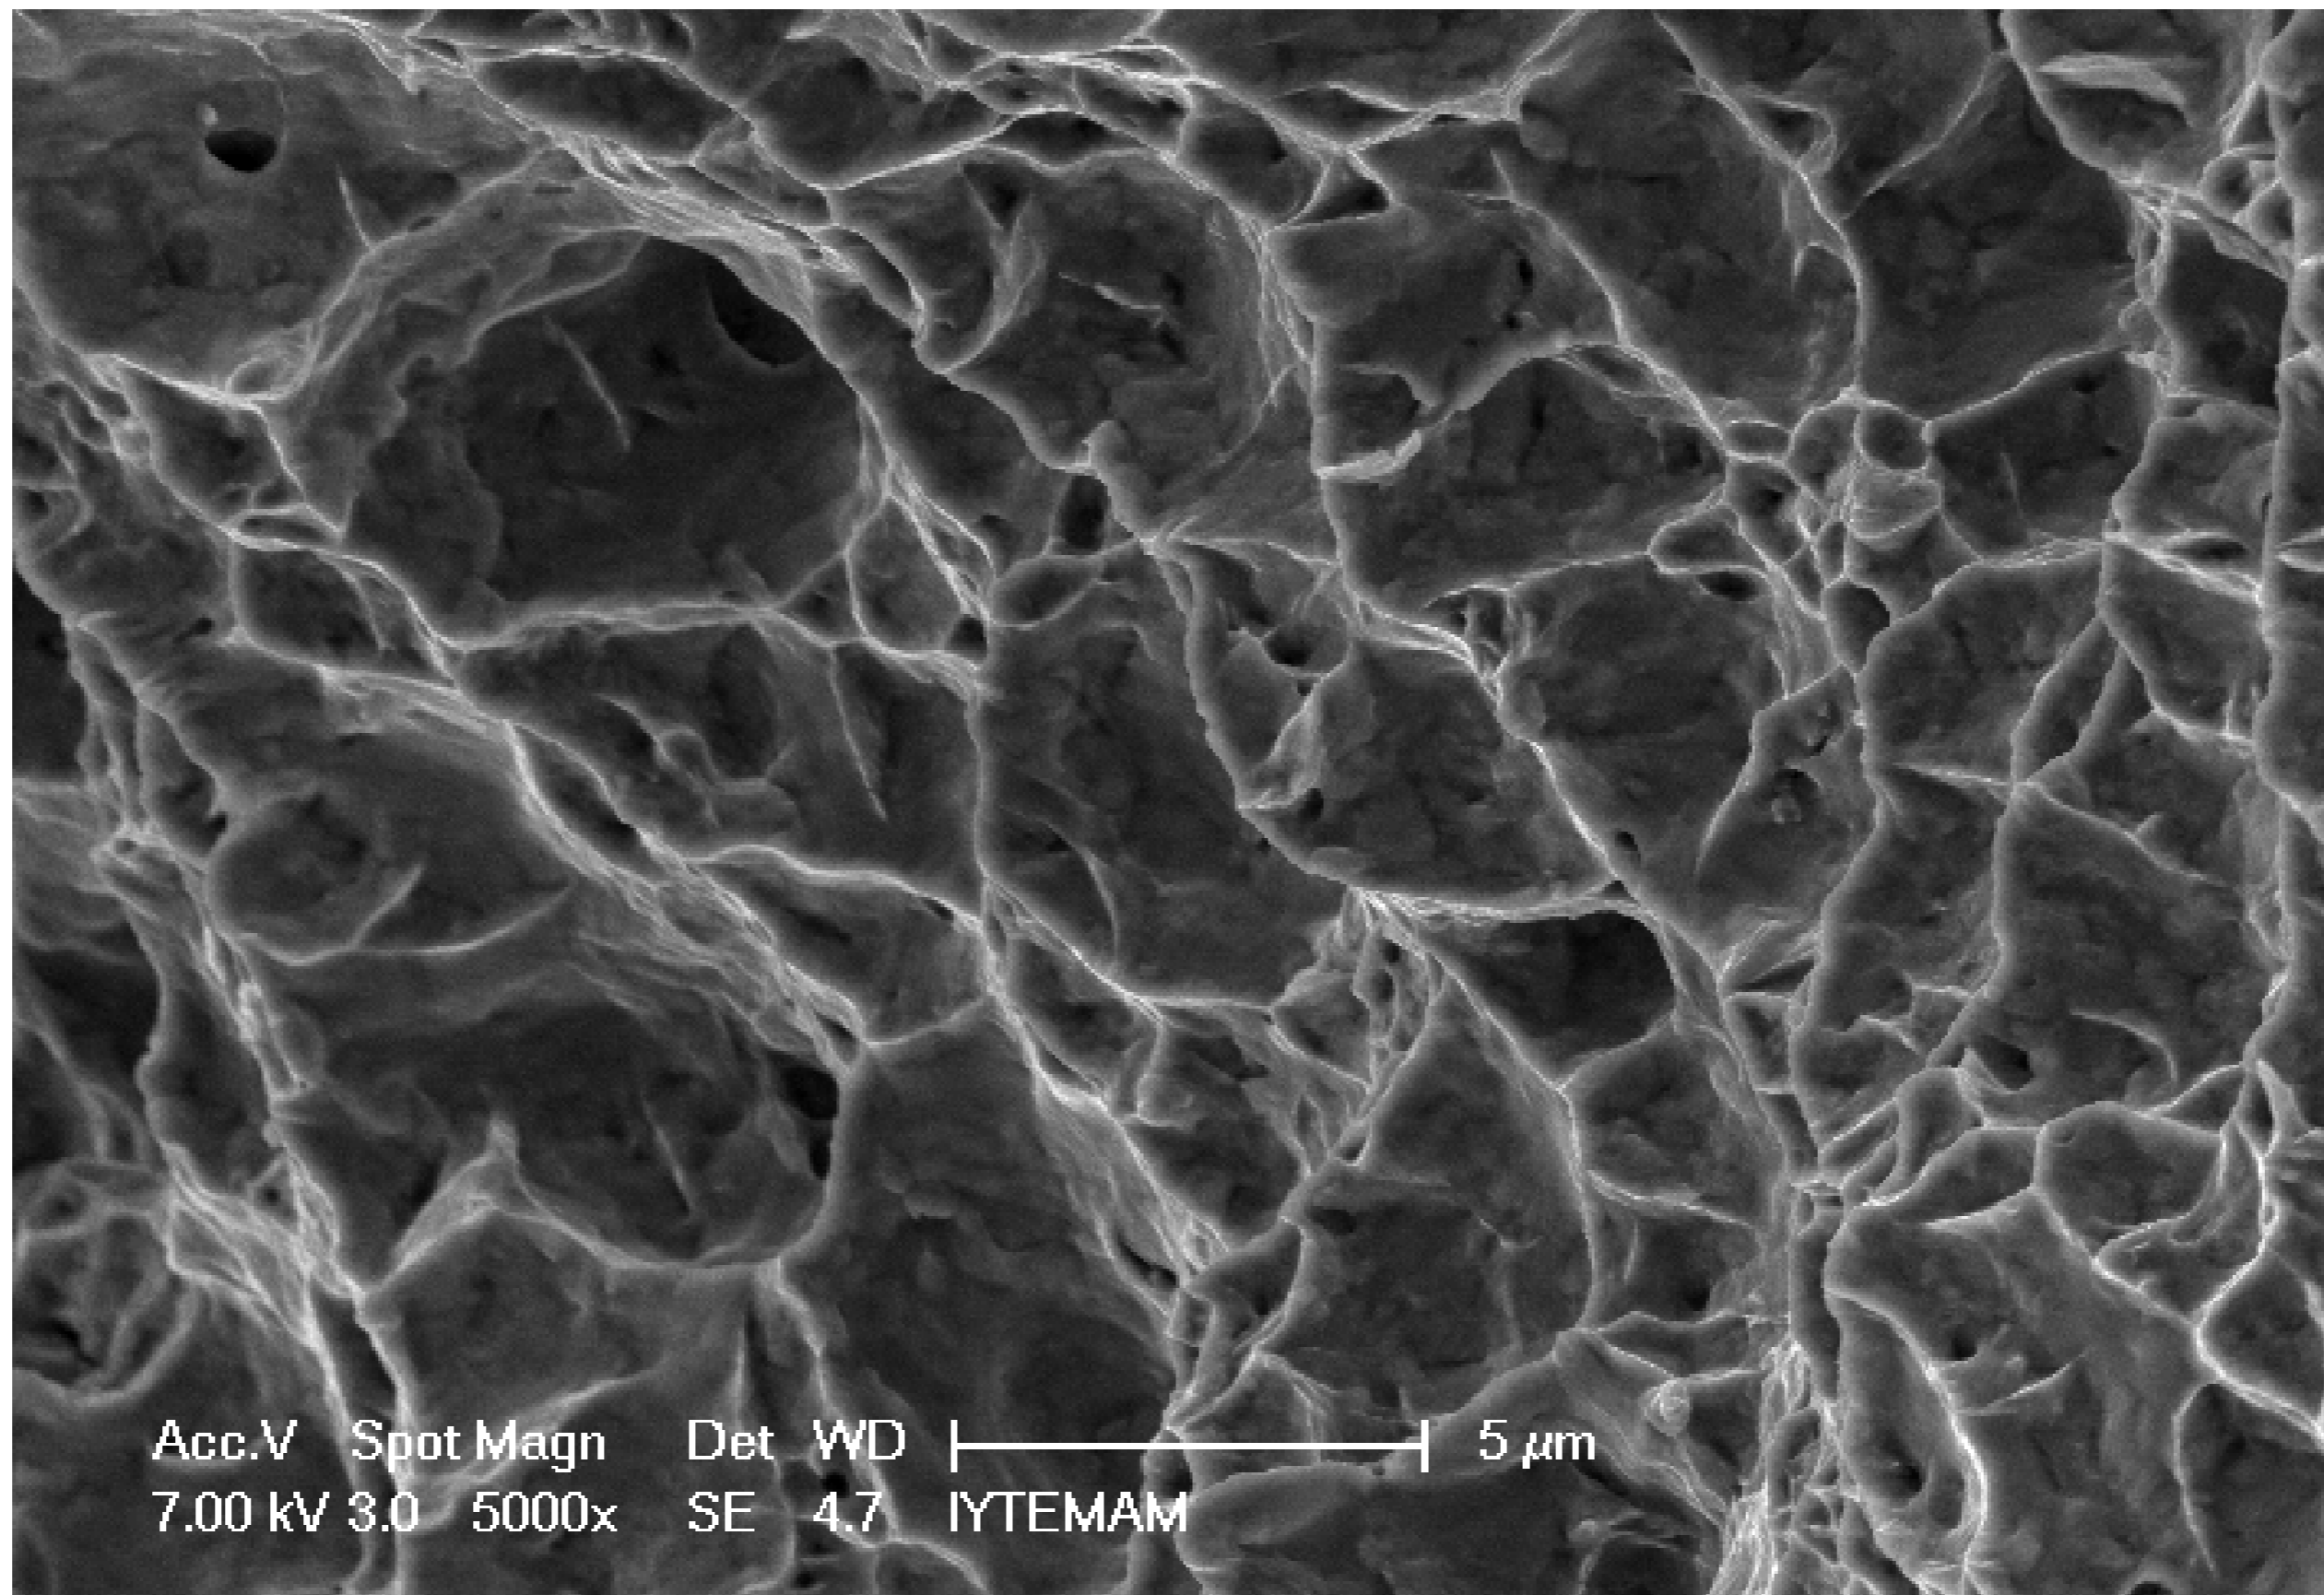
Quasi-static tension test specimen fracture surface at 5000X magnification
